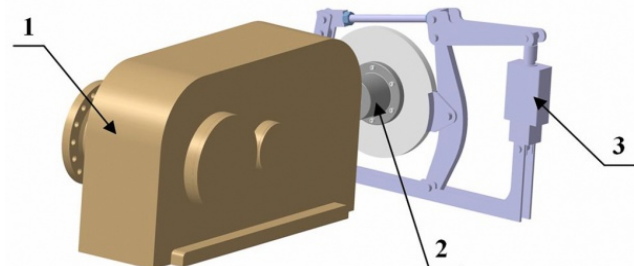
Belt conveyor drive components: 1. gearbox, 2. coupling, 3. drum brake
